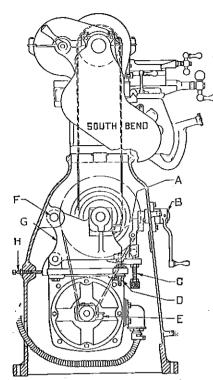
Cross Section End View of Underneath Belt Motor Driven Lathe.
